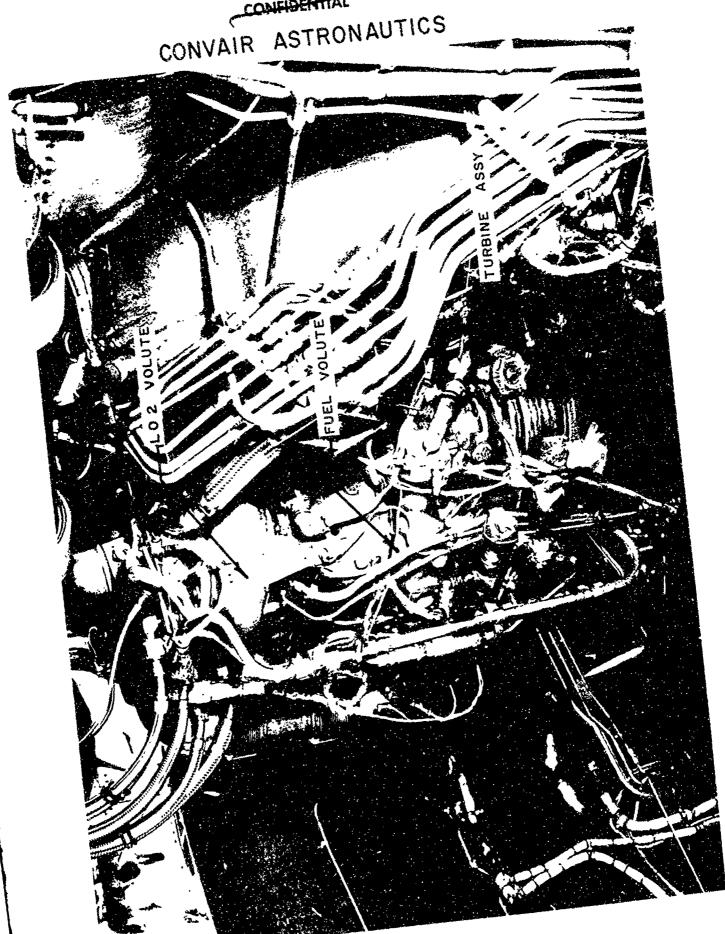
TURBO PUMP ASSEMBLY SUSTR.
